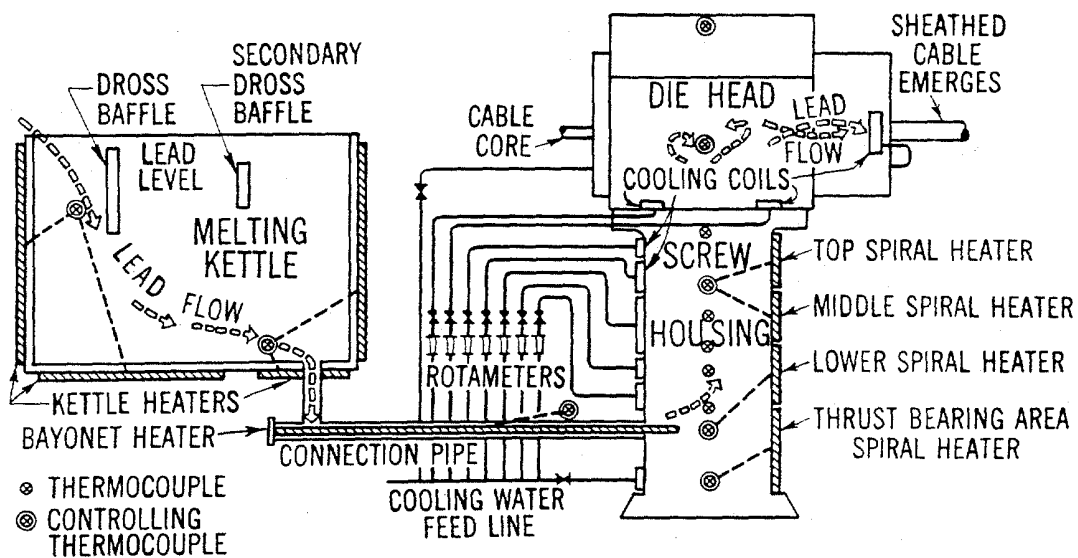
CONTINUOUS LEAD EXTRUSION MACHINE
